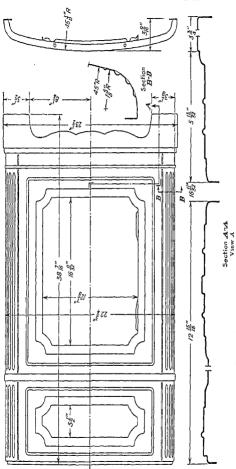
A. View A. front panel of a space heater. (Motor Wheel Corp.)
